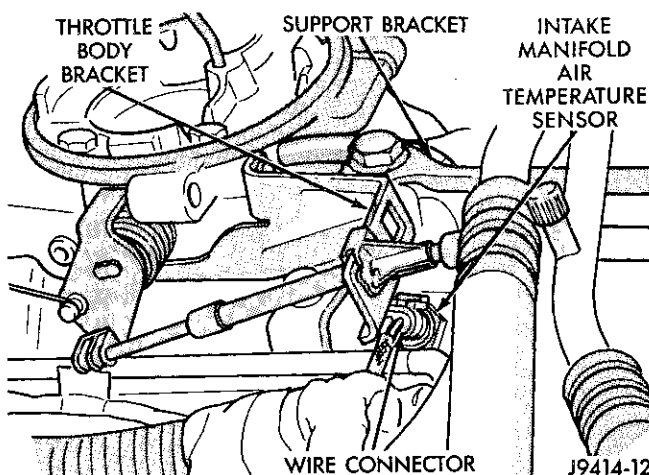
Intake Manifold Air Temperature Sensor—3.9L V-6 Engines
